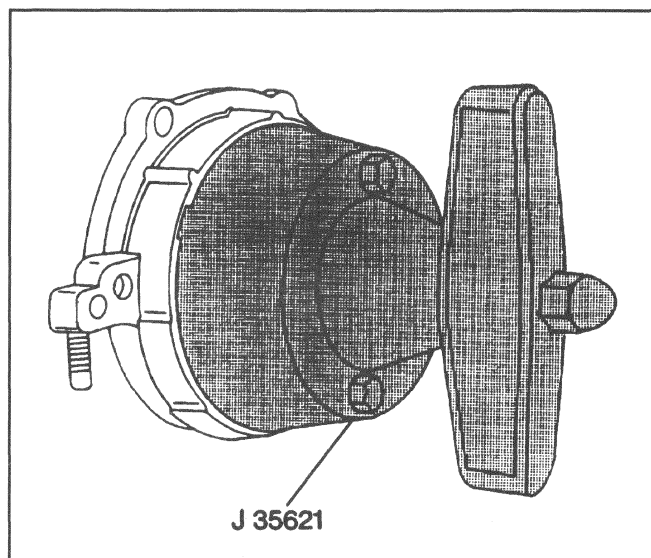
Crankshaft Rear Oil Seal Installation Tool
